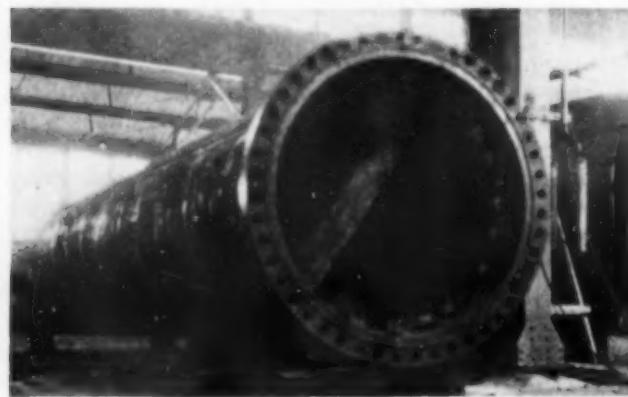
Flanged Ring of Type in Fig. 9-f Clamped in Place Prior to Welding
